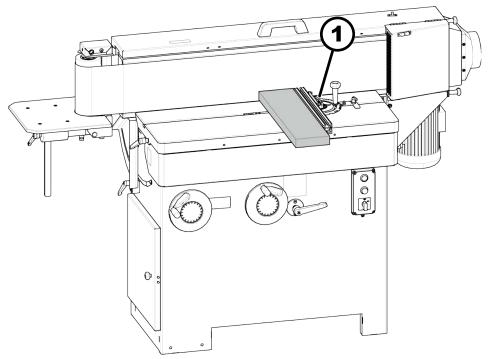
Sanding at the front of the machine 1 Workpiece fence (accessory)
